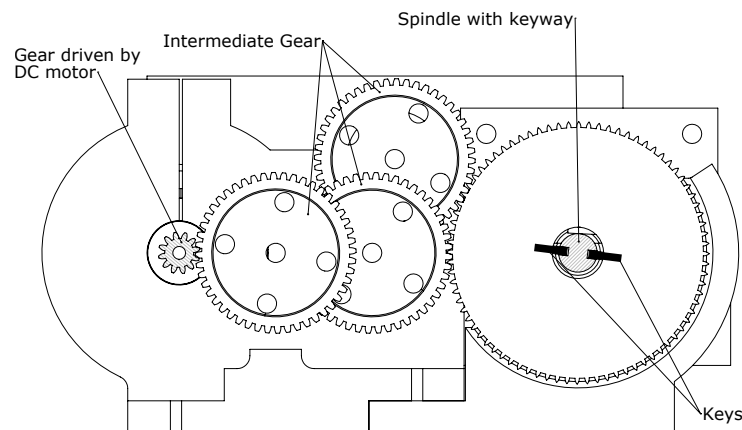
Schematic of rotary actuation components, front view highlighting the transmission from DC motor to spindle
